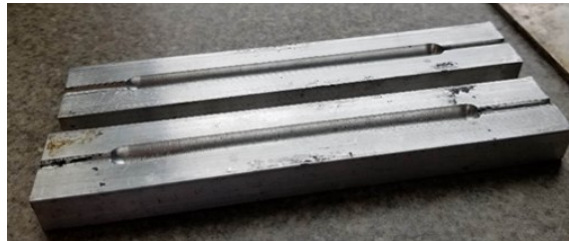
Mold for compression molding polyethylene tube specimens.
